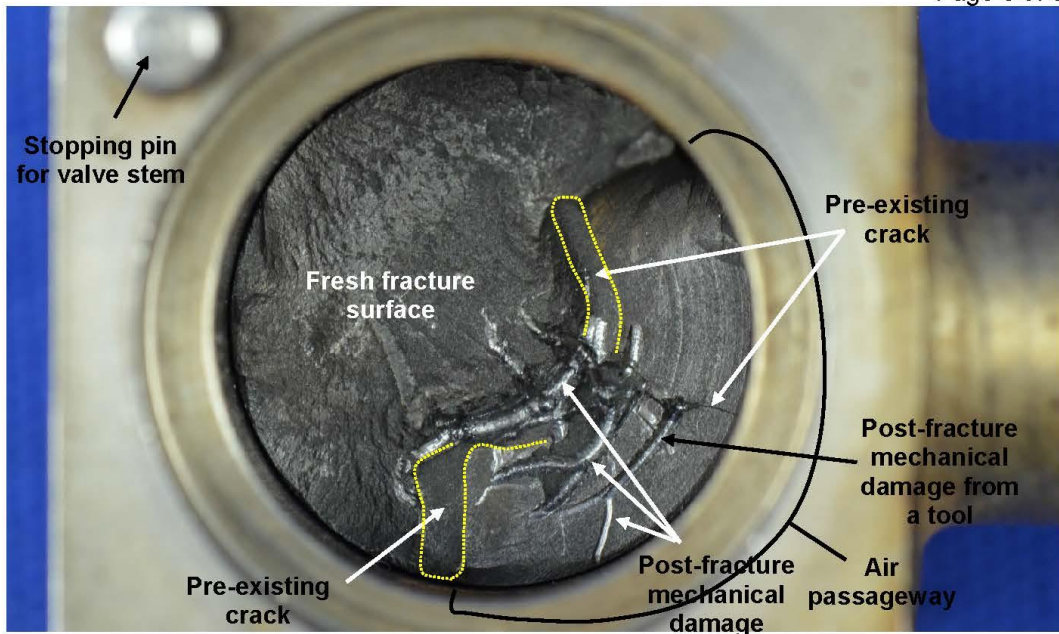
Views of the fracture valve stem in the “open” position. The fracture features revealed two conflicting initiation locations. Post-fracture mechanical damage was observed.
